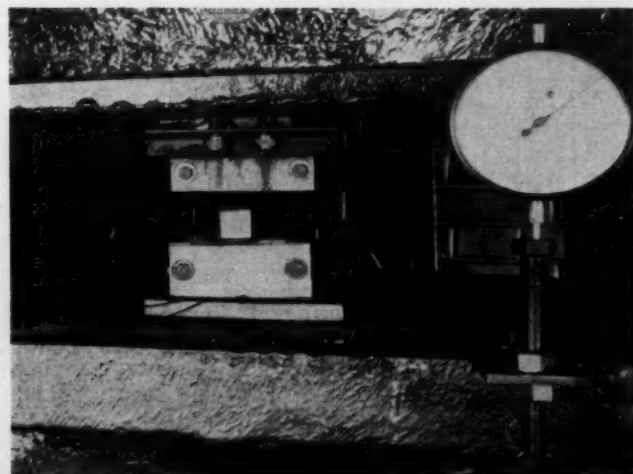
Hydraulic press with die blocks in place for forging test bars.
